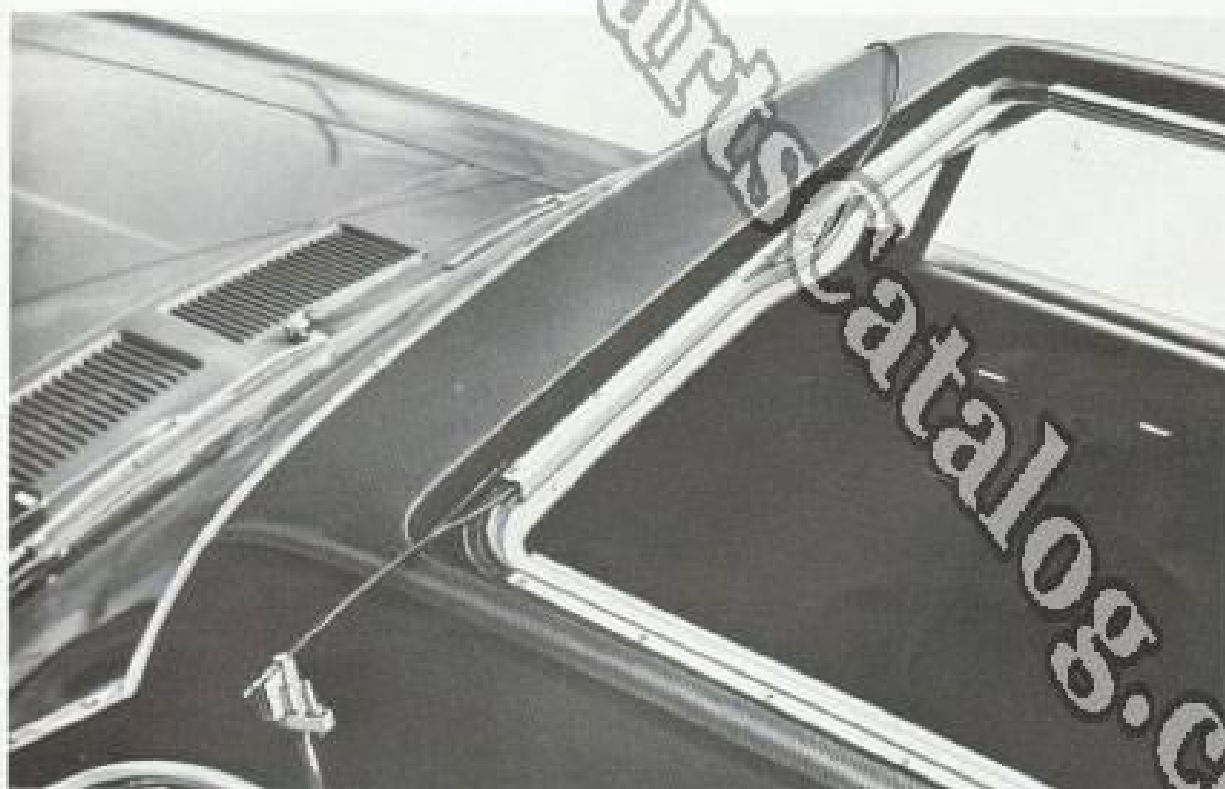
Rear Slide and Cable Removal Out of Front Guide Connection
